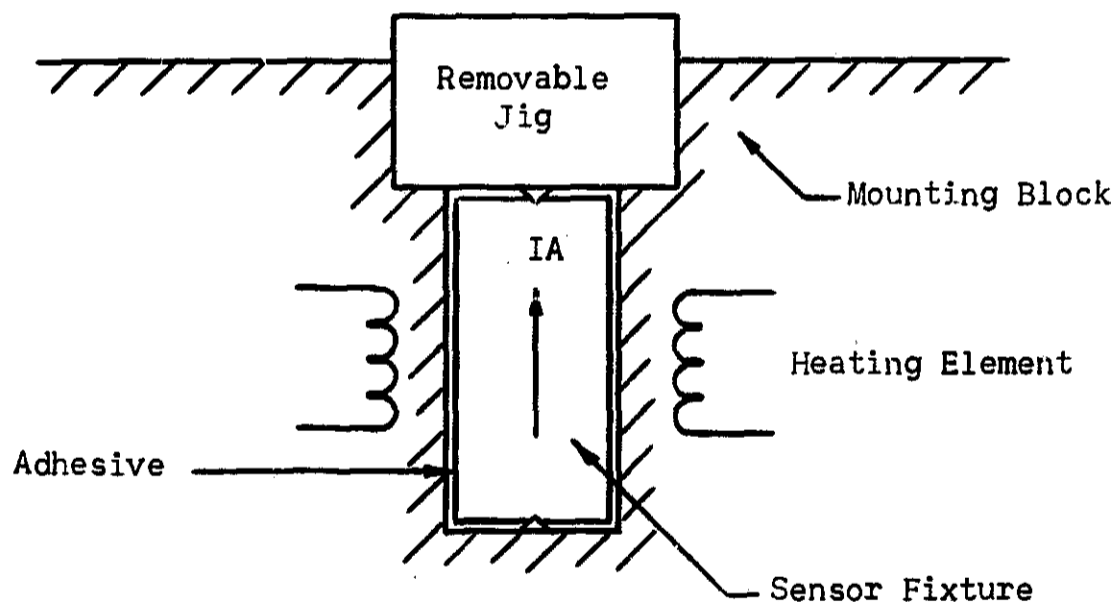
Center Mounting Jig for Aligning Input Axis Parallel to Hole Axis
